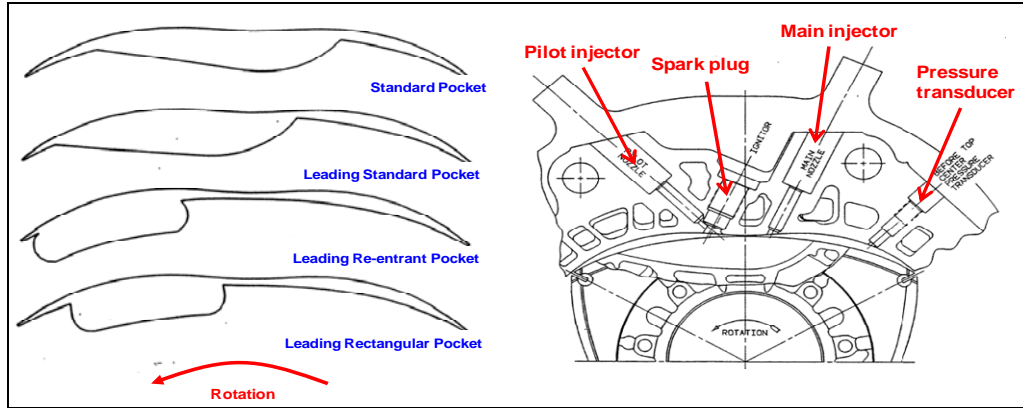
Four rotor geometries tested (left) and cross section of standard rig engine at top center position (24).
